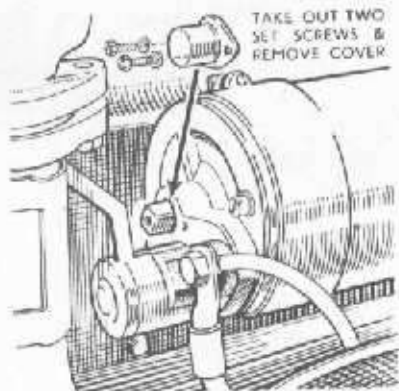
Starter motor, showing the squared end of the shaft which can be turned with a spanner in the event of the starter jamming.
